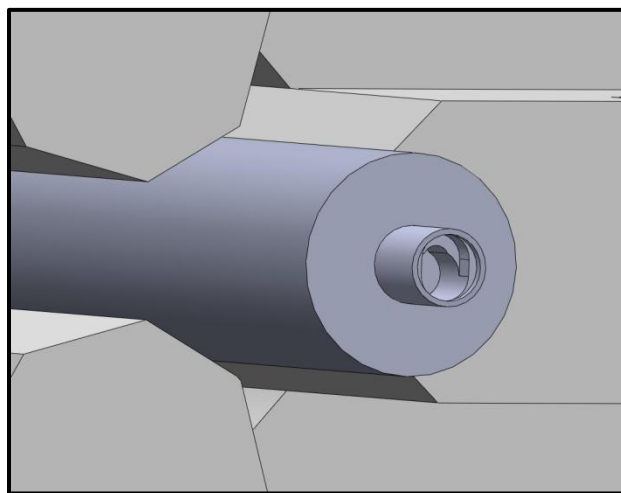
The part is secured in the lathe chuck, ready to be removed from the rod.
